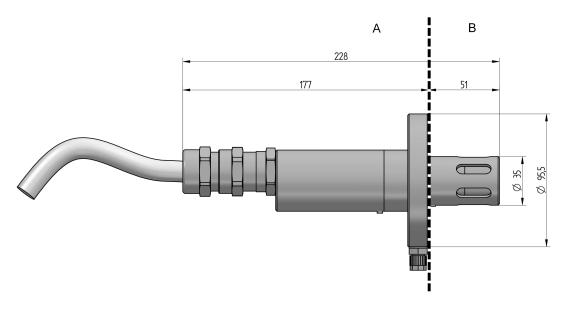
Dimensional drawing Combination Probe KS1D-Ex (unit of measurement in mm)
